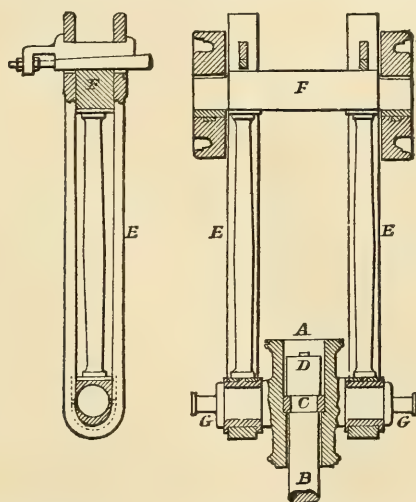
Crosshead and Side-links of Parallel Motion for Piston-rod of Cornish Engine.
